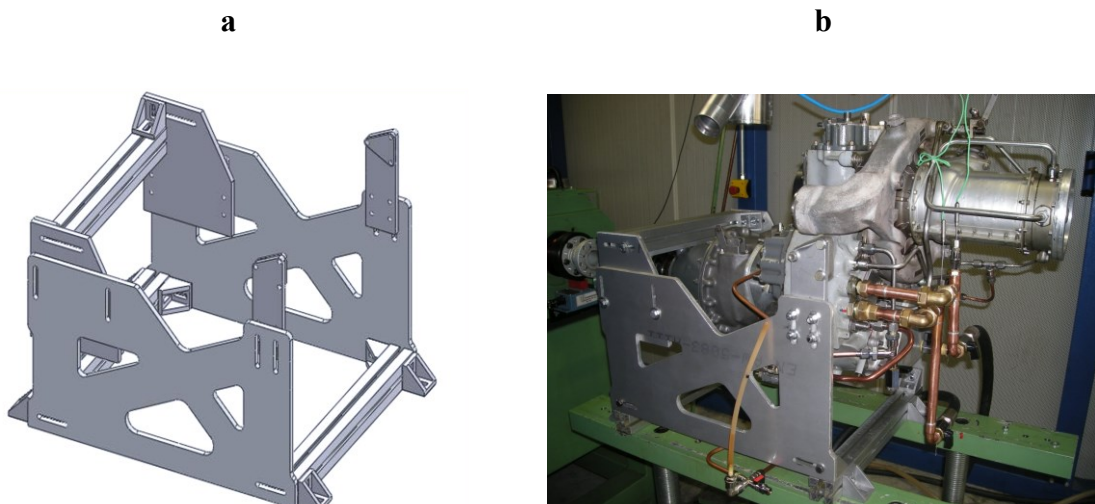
Designed aluminum frame: (a) 3D representation; (b) installation
